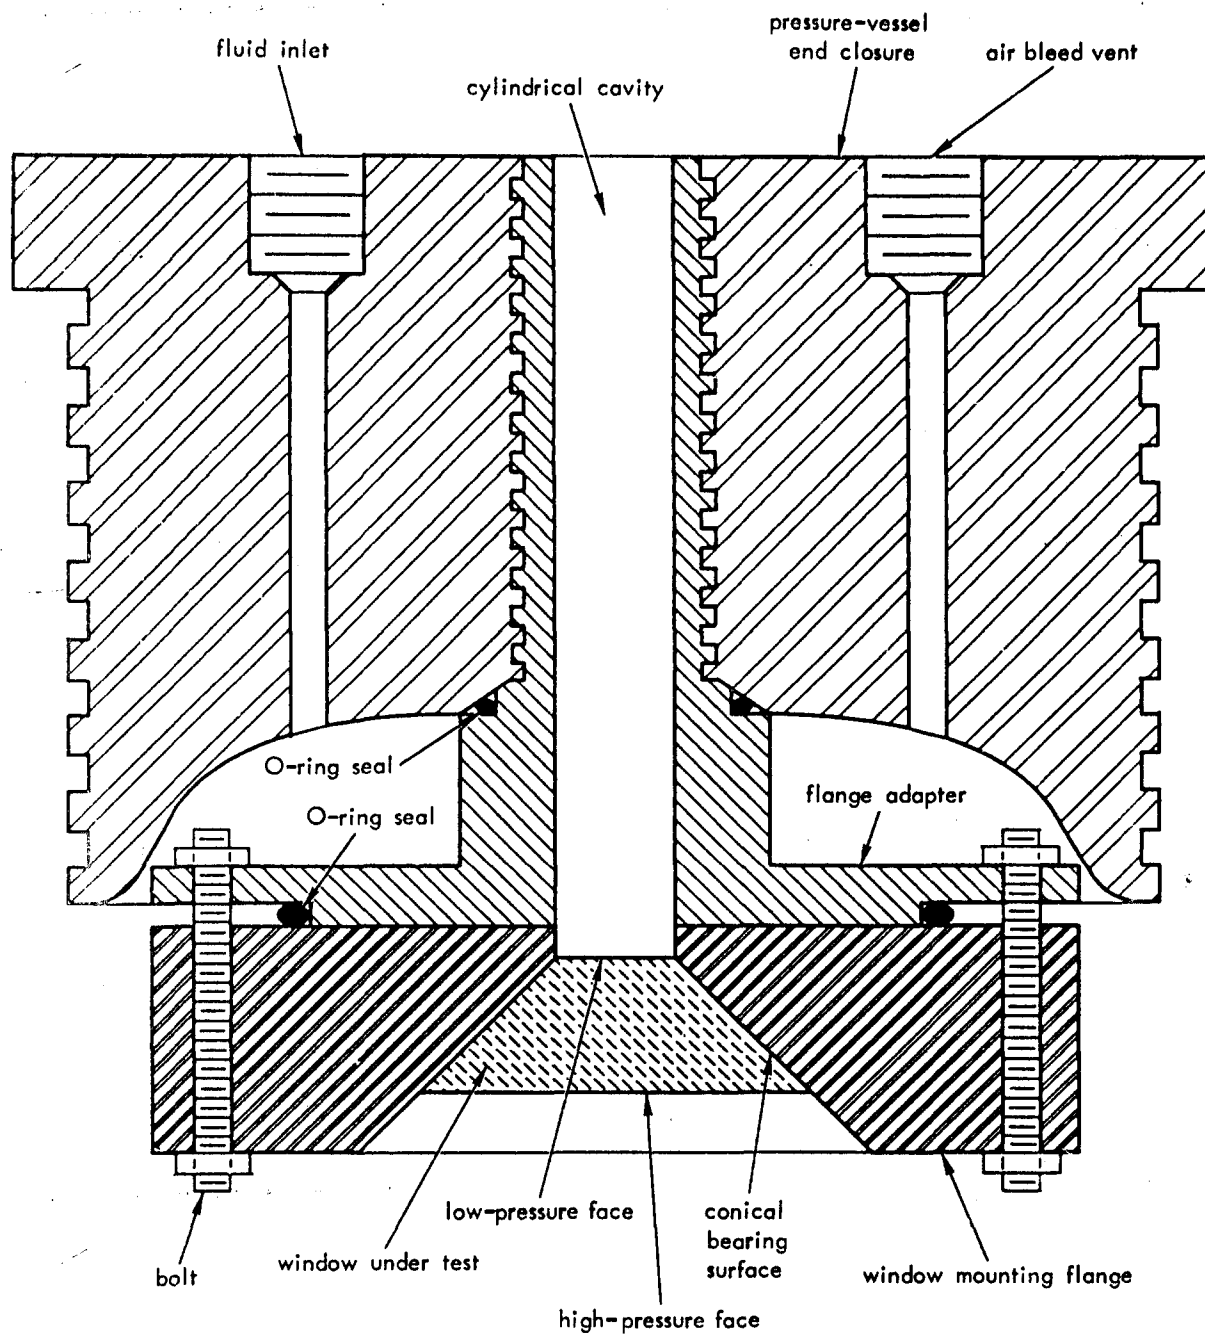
Flange adapter attached to DOL Type I mounting flange, with mounting assembly positioned in end closure of pressure vessel.
